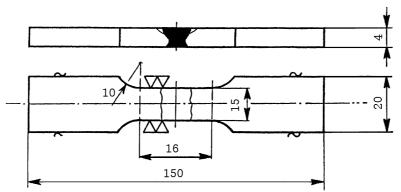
Tensile specimens used for UTS measurement in butt-welded joint.
